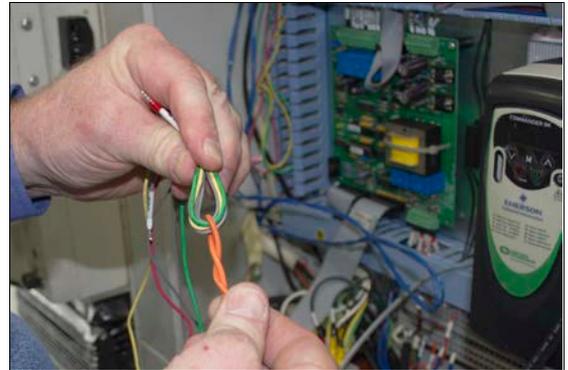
Example of a spare wire grouped together with the Z-axis motor and brake wires.
